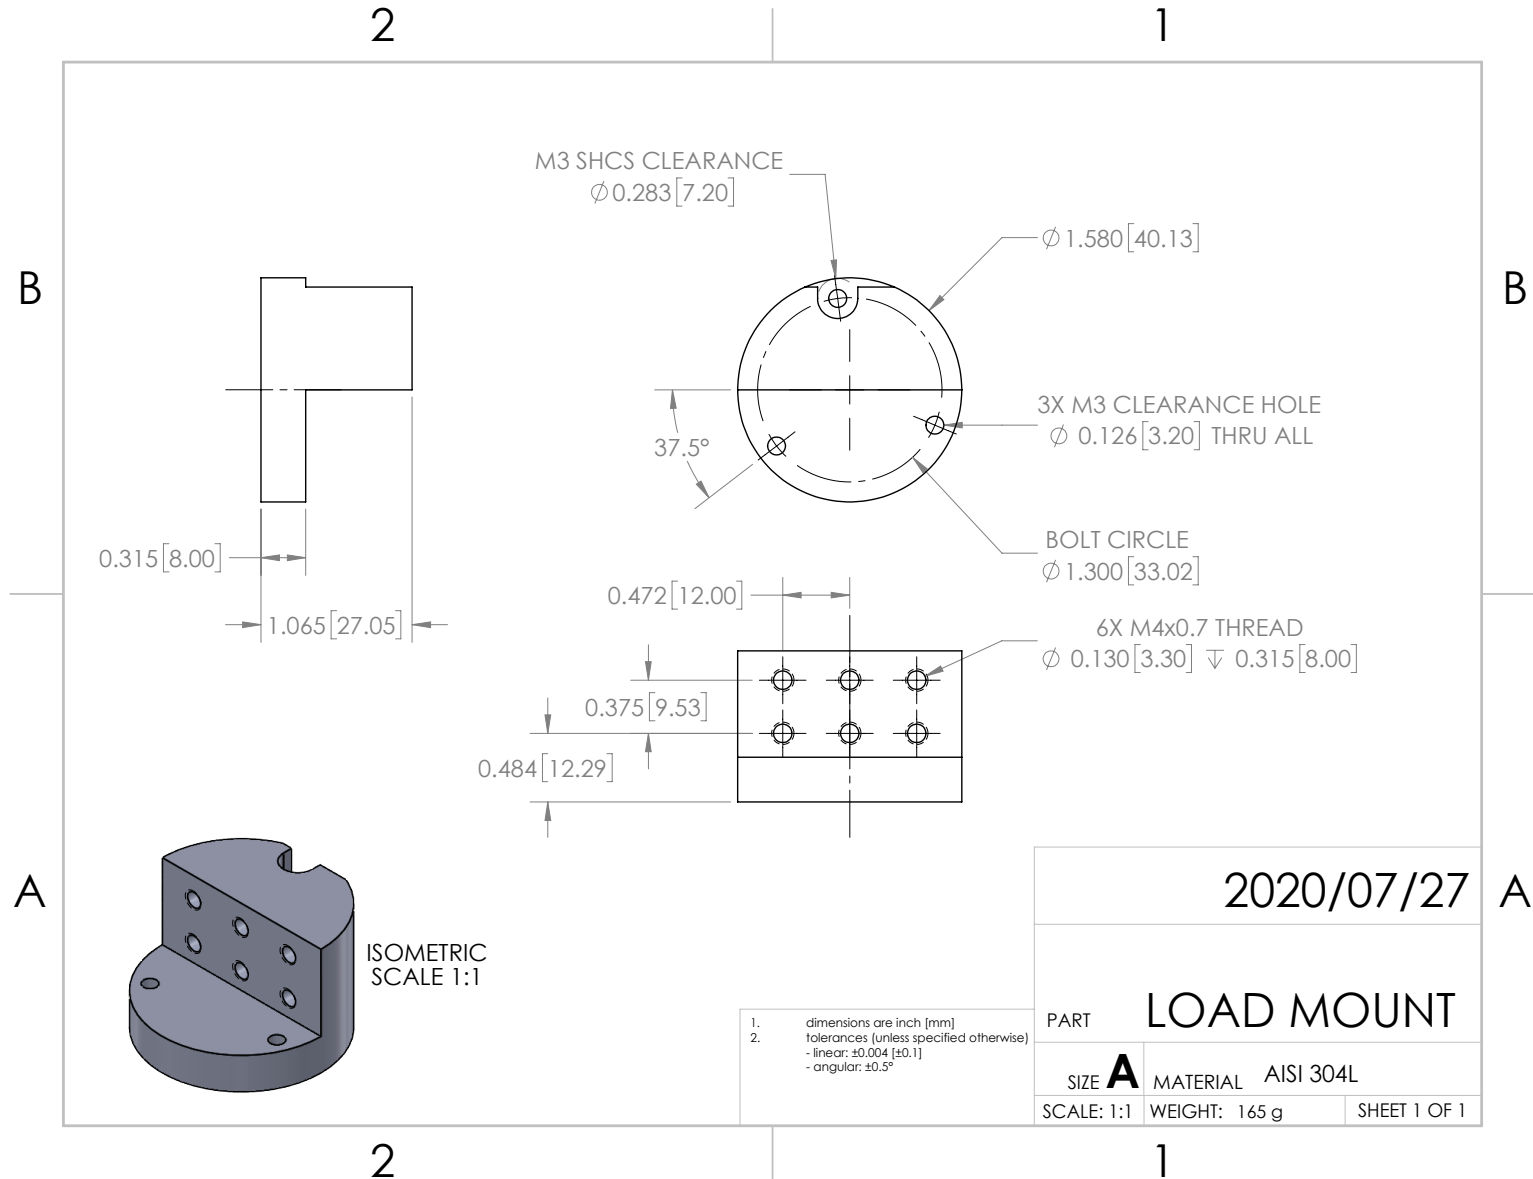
Mounting fixture for bolting the lower glue fixture to the load cell.
